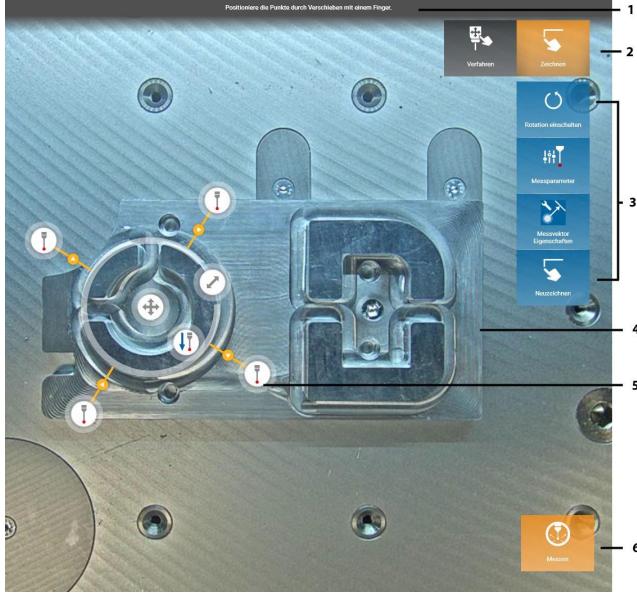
The user interface of CaMea superimposed on a workpiece. The user can intuitively select parts of the geometry and define probing points. The figure shows 1) Information text, 2) Mode Selection, 3) Option Buttons, 4) Workpiece, 5) Probing point handle and 6) Start measurement button.
